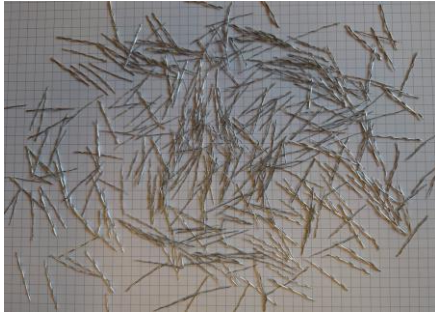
Aluminium – Chips –O/W- Finishing Macro View.
